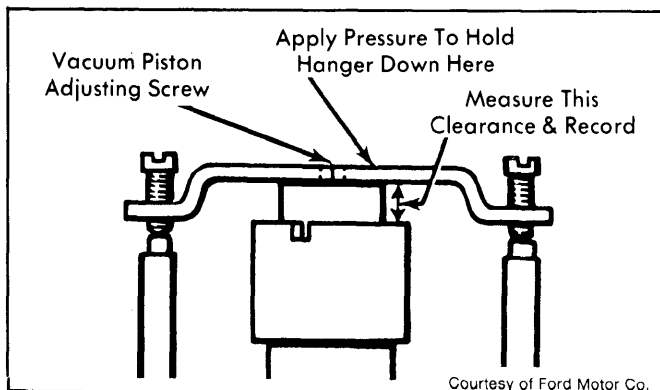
Metering Rod Hanger & Vacuum Piston Measurement
